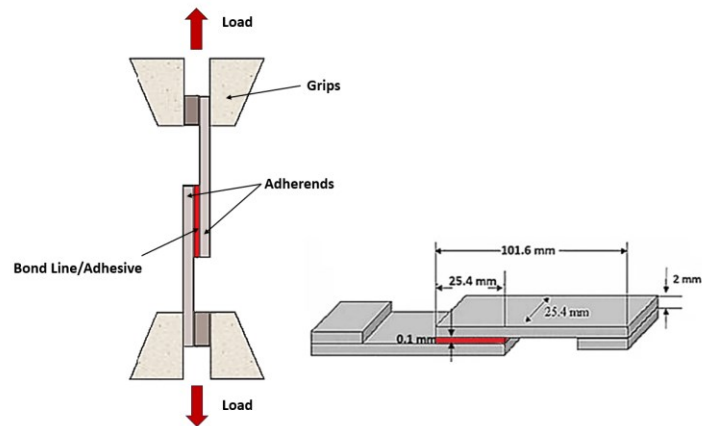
Typical shape of single lap shear specimen and scheme of testing set-up.
